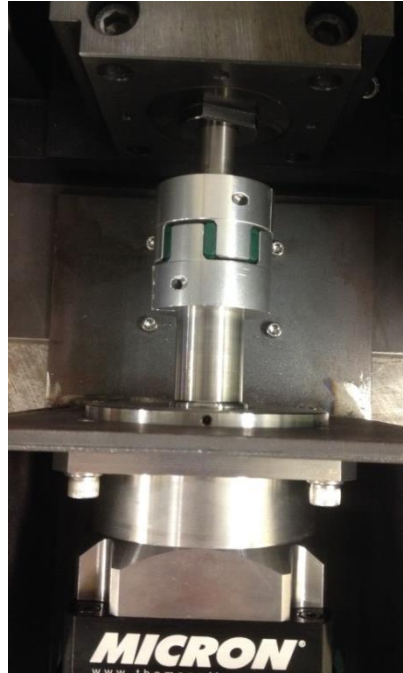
Mechanical connection (i.e., coupling) between gear reducer and the linear positioning mechanism.
